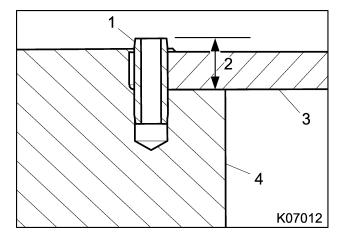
Crankshaft timing disk alignment spring pin (cut-away)
